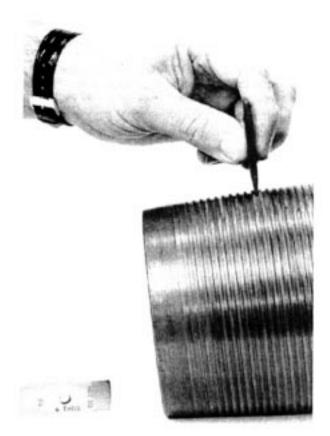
Extreme-Line Thread Width Go-No-Go Gauge
